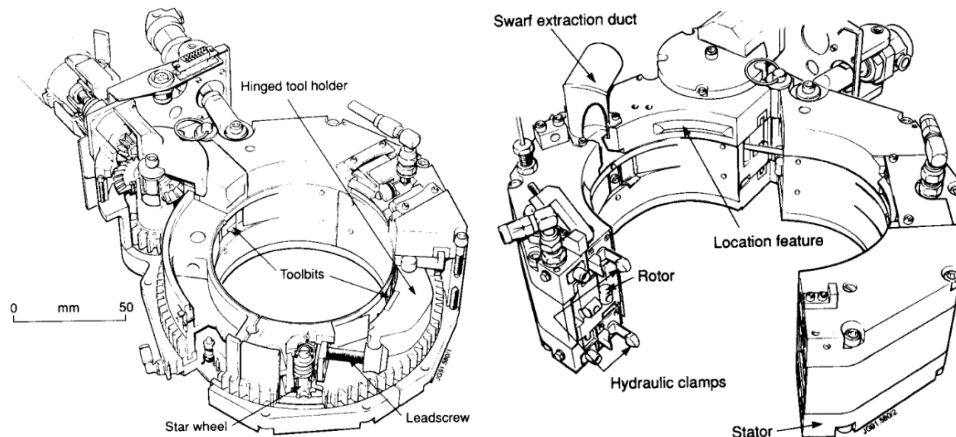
Sleeve cutting tool in clamped and unclamped configurations [14]
